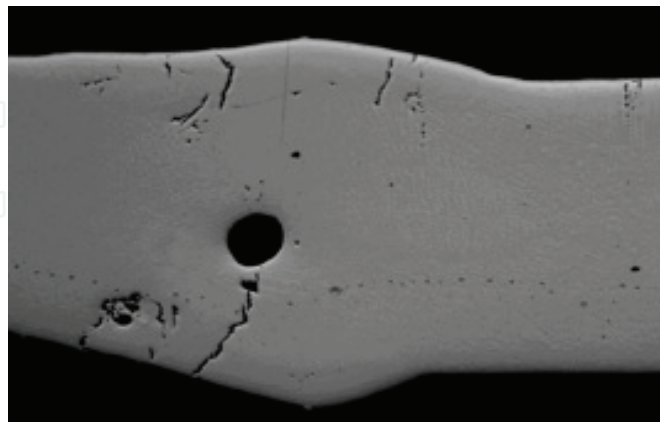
Sample of laser welding by Rofin with filler observed by optical microscope.
